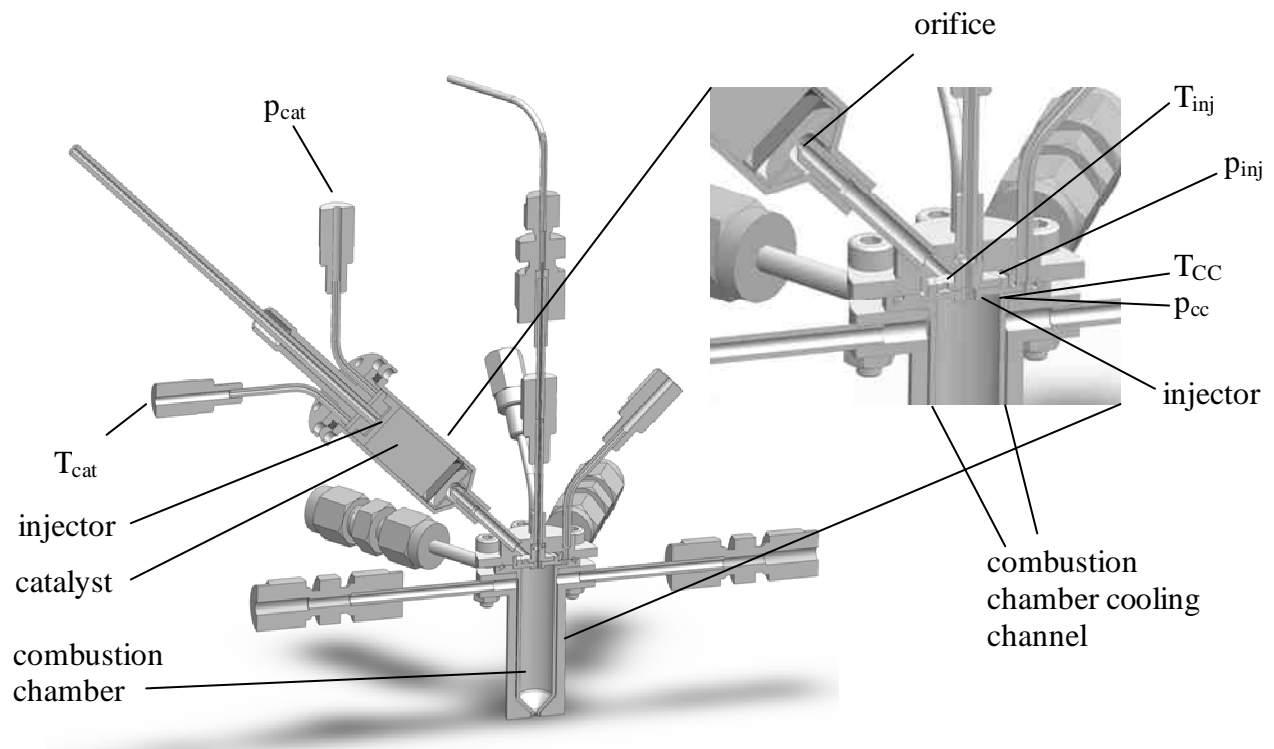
CAD cut view of thruster with combustion chamber injector detail and instrumentation
